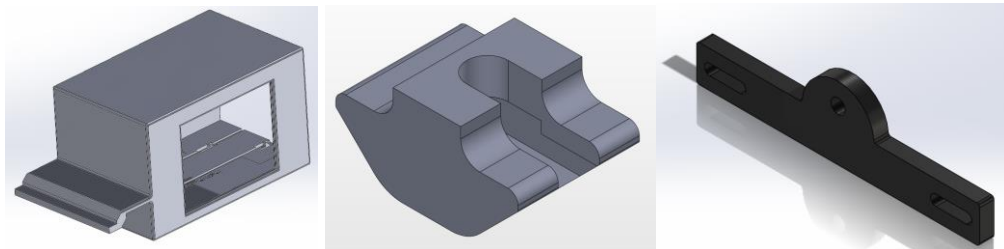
"peripheral mount" used to retain strain gauge instrument amplifier chip and 44 pin adapter (left), load cell mount (center) used to mount load cell to frame via single 4mm bolt and wingnut, "universal mount" (right) used to mount motion controller and power supply to frame
